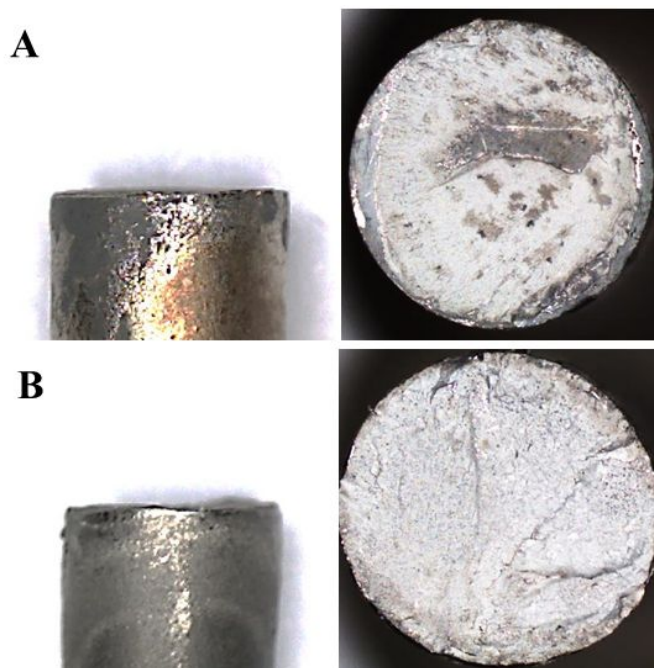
(A–B) Optical microscopy images of the fracture surface for two filler metal types
